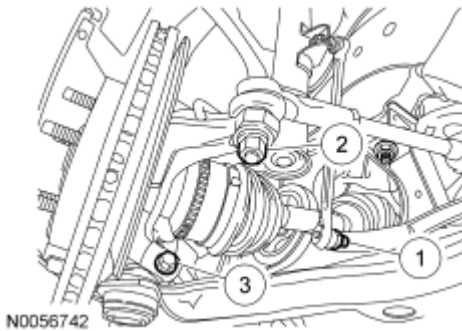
Identifying Stabilizer Bar Link, Retaining Nut, And Knuckle Bolt
